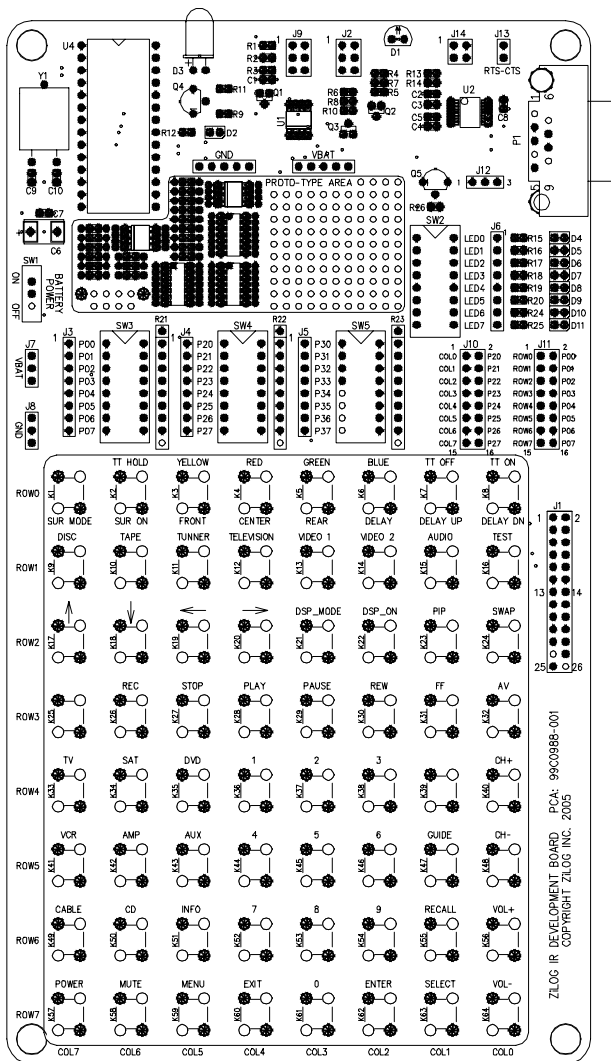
The ZiLOG Crimzon™ Development Board Accessory Kit
